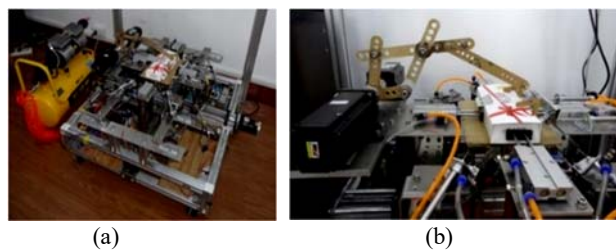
The prototype of carton packing machine. (a)packaging machine, (b)cover folding device.
